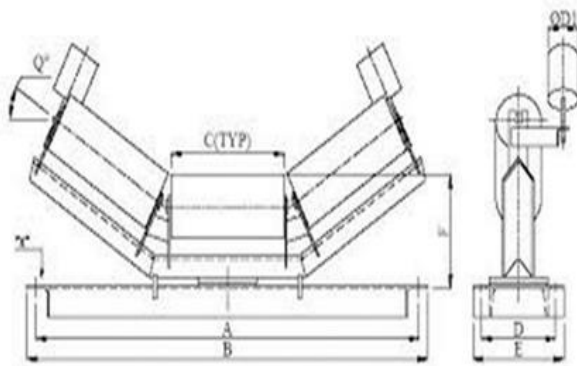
(CARRING IDELERS IN BELT CONVEYOR)
